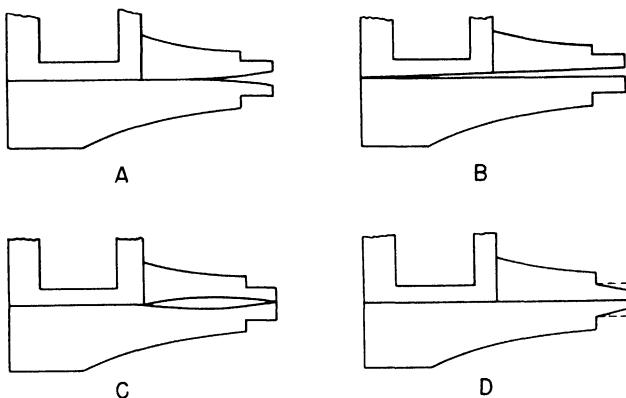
Various jaw conditions which result in inaccurate caliper measurements.
